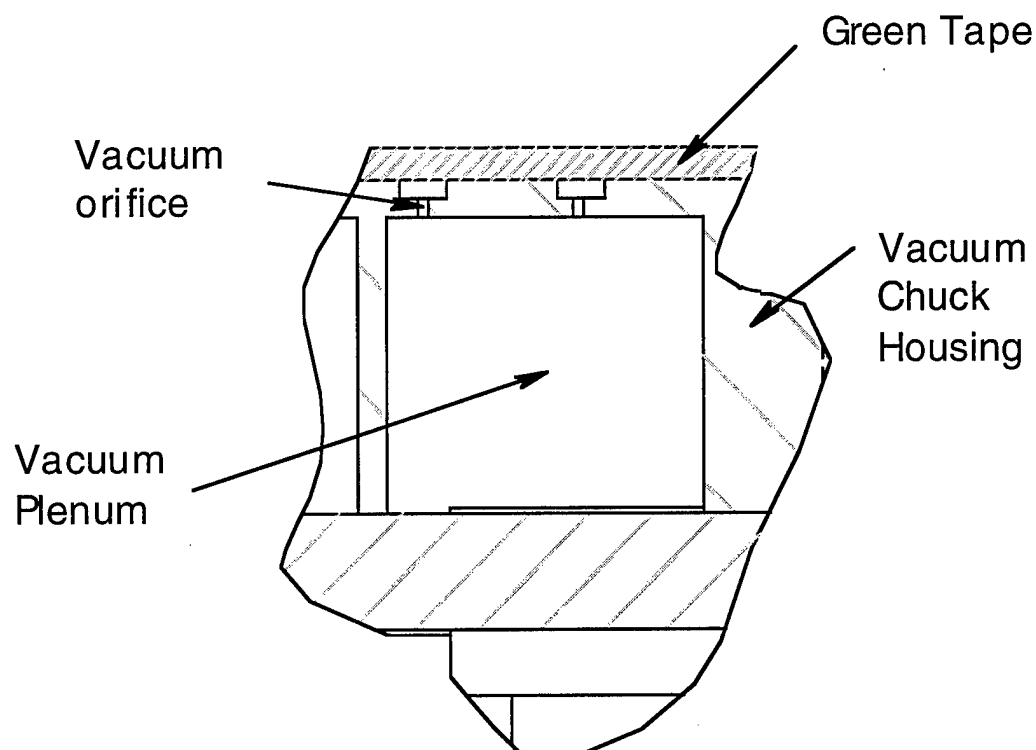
Green Tape vacuum chuck assembly, detail view.
